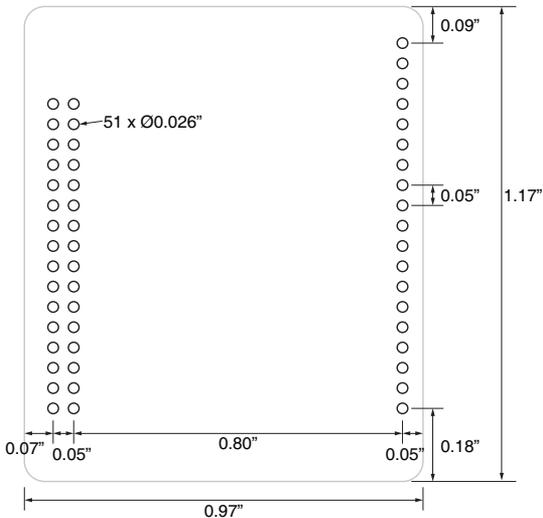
EVM-fff-PRC-CAS and EVM-fff-PRC-UFL PCB Layout Dimensions
